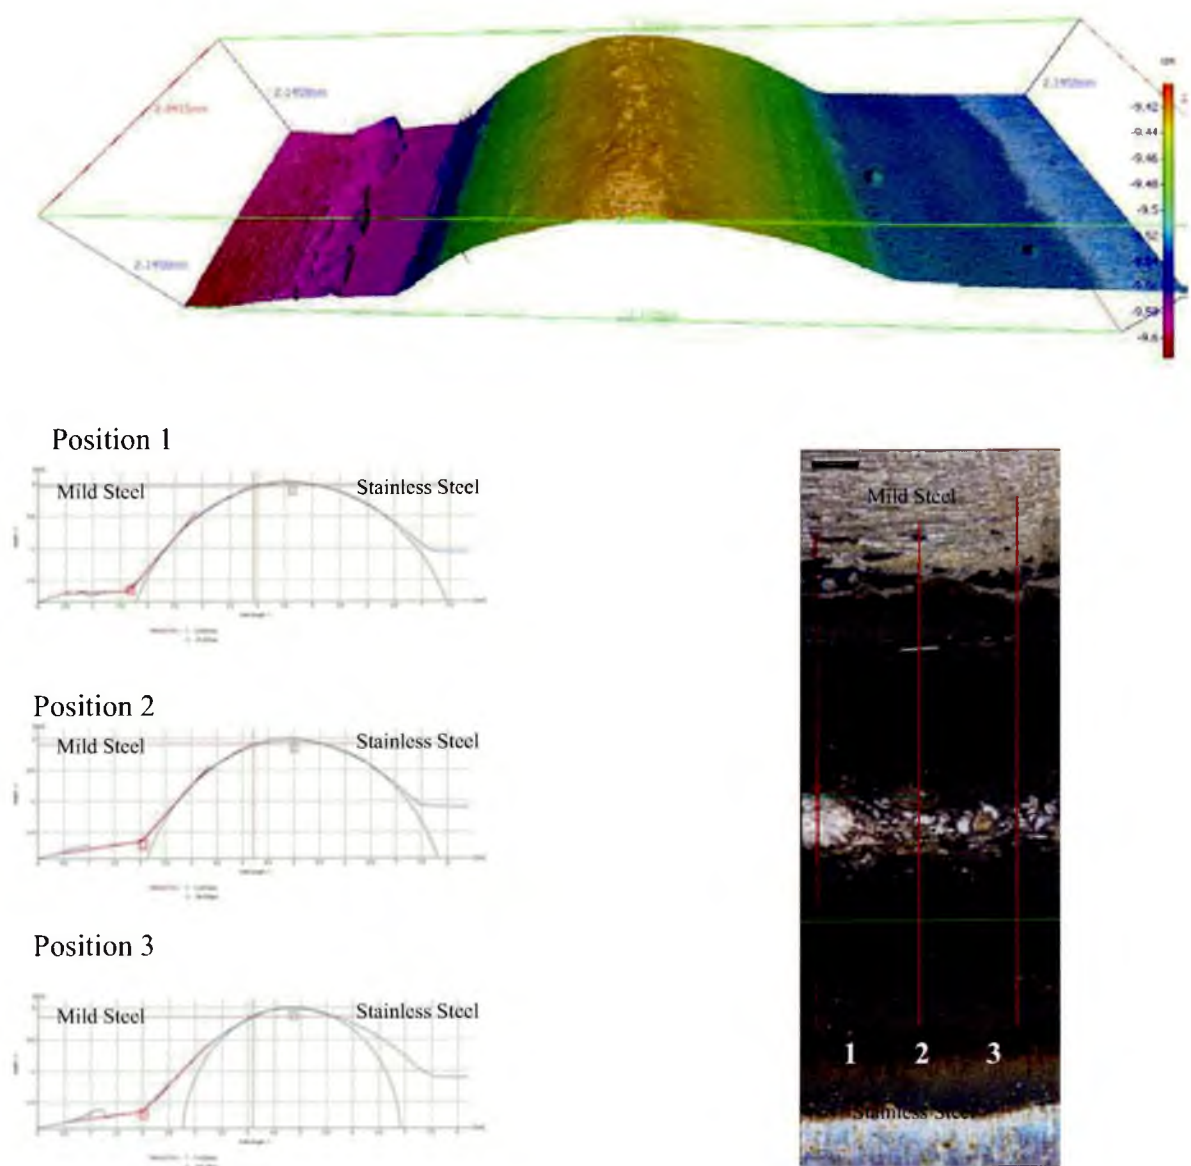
IFM 3D surface image and surface profiles for the front of the weld bead of sample C1.6.1
